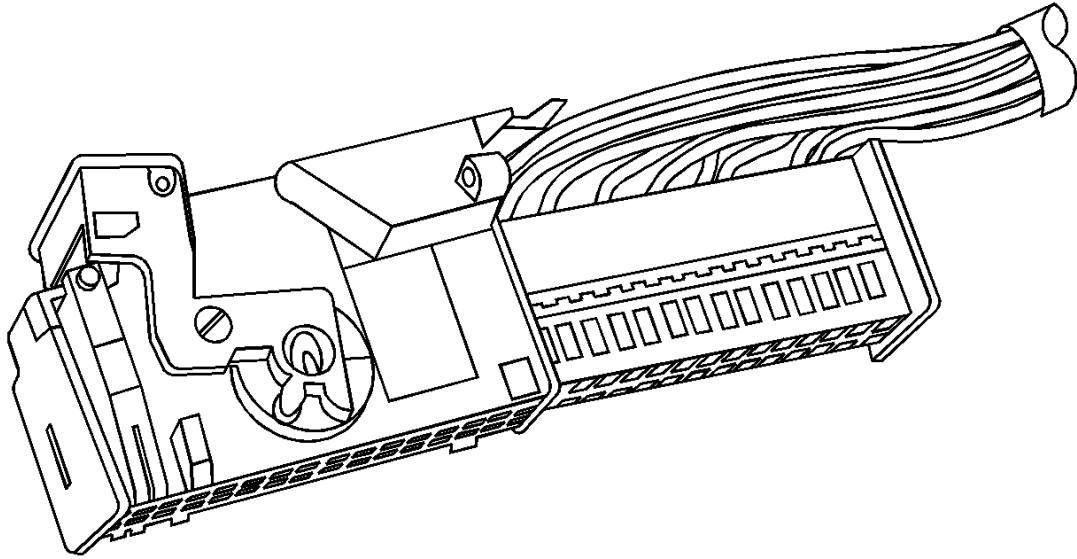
Sliding Inner Connector Out Of Connector Housing
